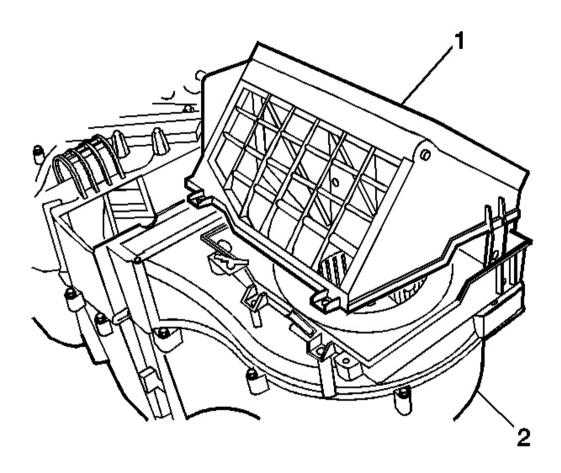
Air Distribution Housing And HVAC Module Courtesy of GENERAL MOTORS CORP.
